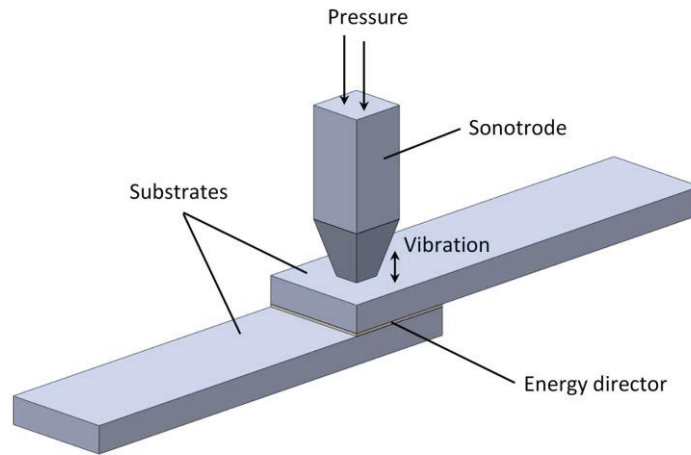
Schematic representation of ultrasonic welding process.⁷⁵
